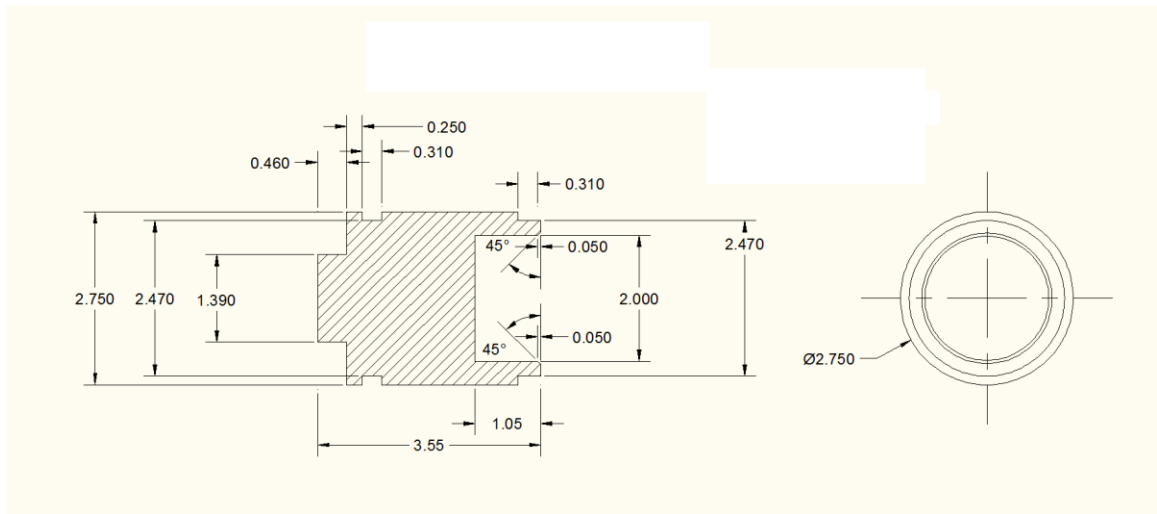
Aluminum mass (dimensions in inches, material: aluminum)
